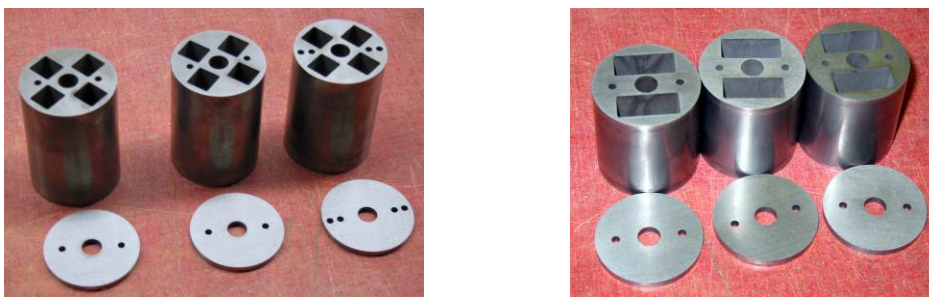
HTIF tungsten sample holder bodies and end caps prior to e-beam welding.
